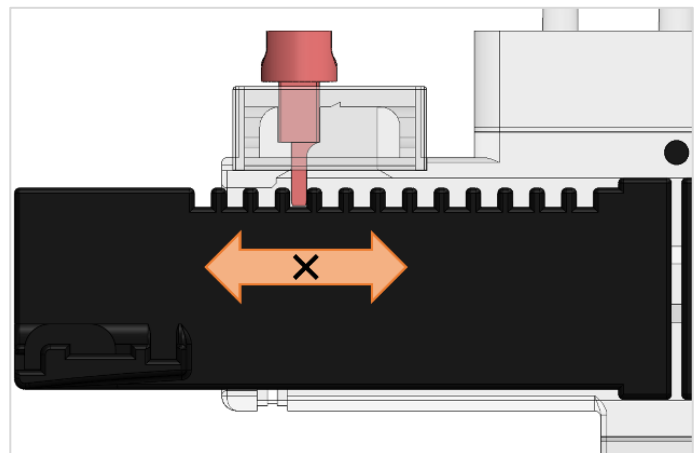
Final Prototype's Sliding Element with the Tooth Engaged
